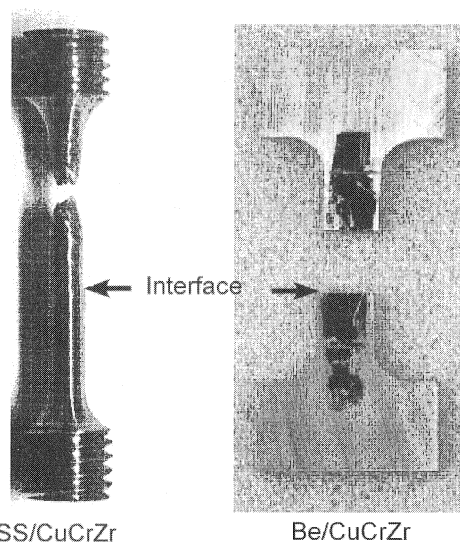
Fractured tensile specimens after mechanical testing of joints.
